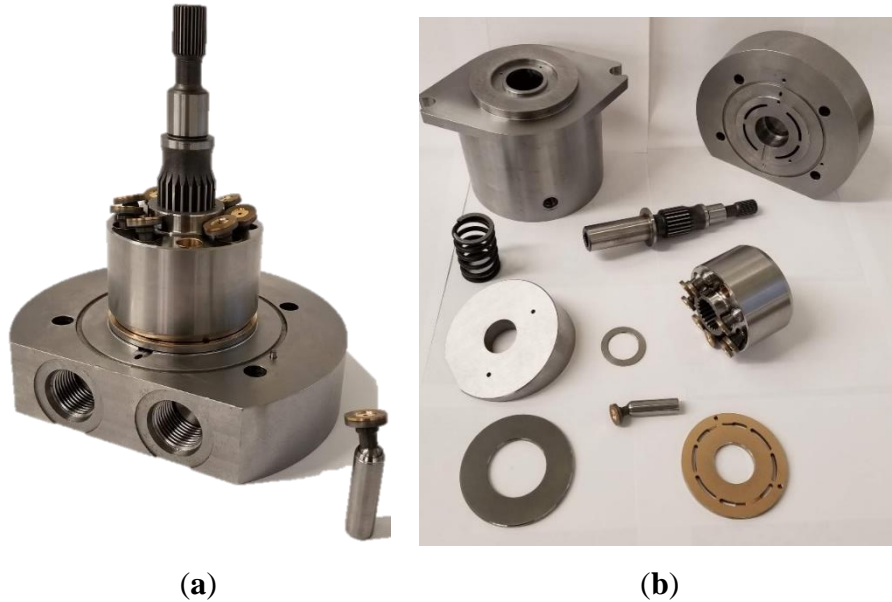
Axial piston machine of swash plate type physical prototype.
